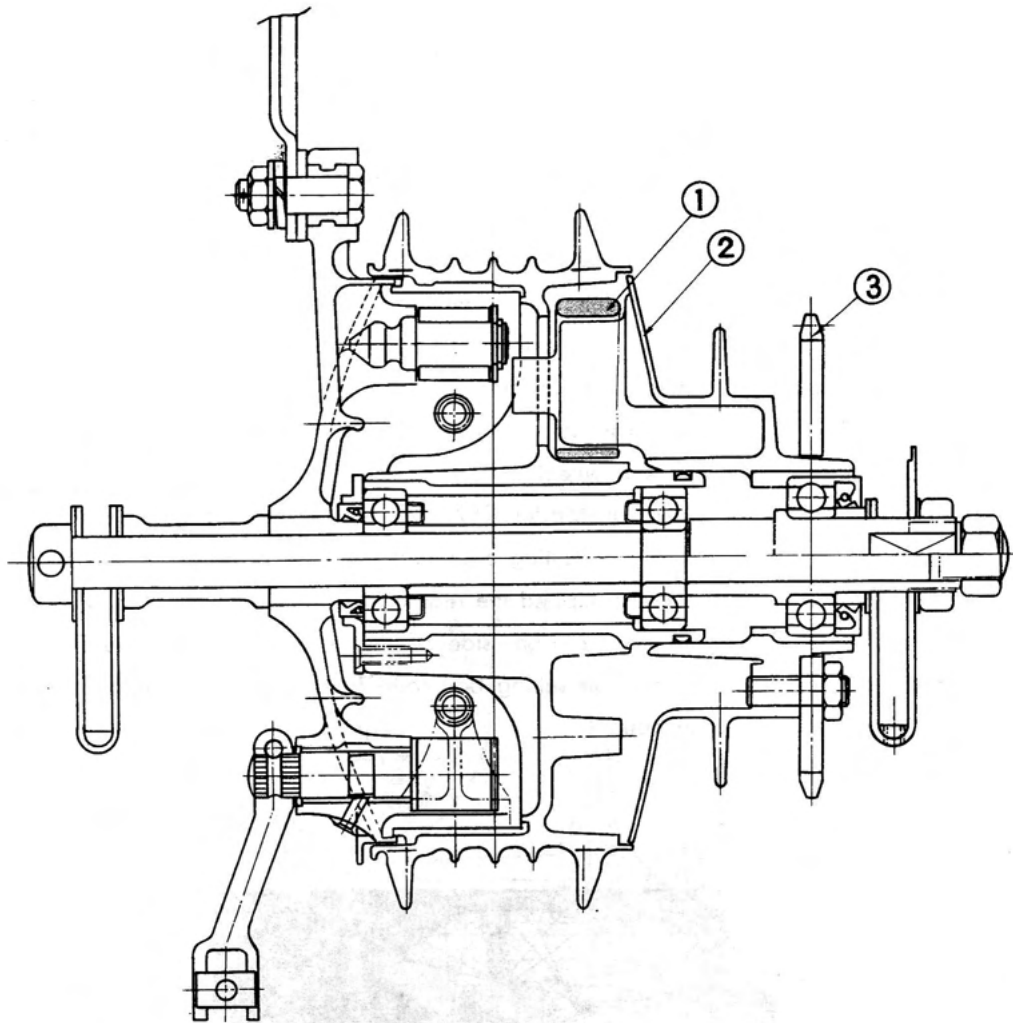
To draw out the rear wheel from the frame (Model CB72, 77)
